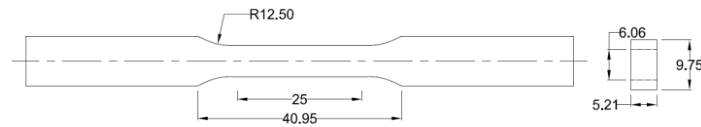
Geometry of dog-bone shaped specimen (dimensions in mm)
